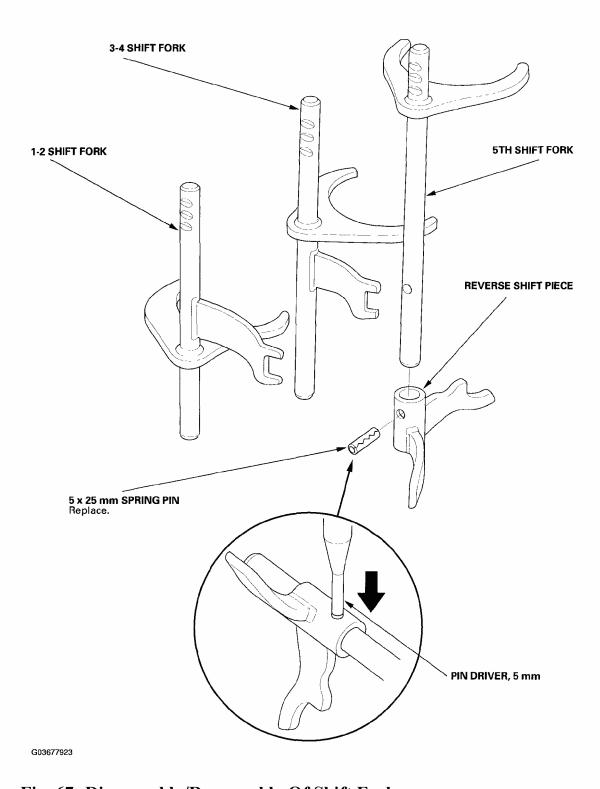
Disassembly/Reassembly Of Shift Fork Courtesy of AMERICAN HONDA MOTOR CO., INC.
